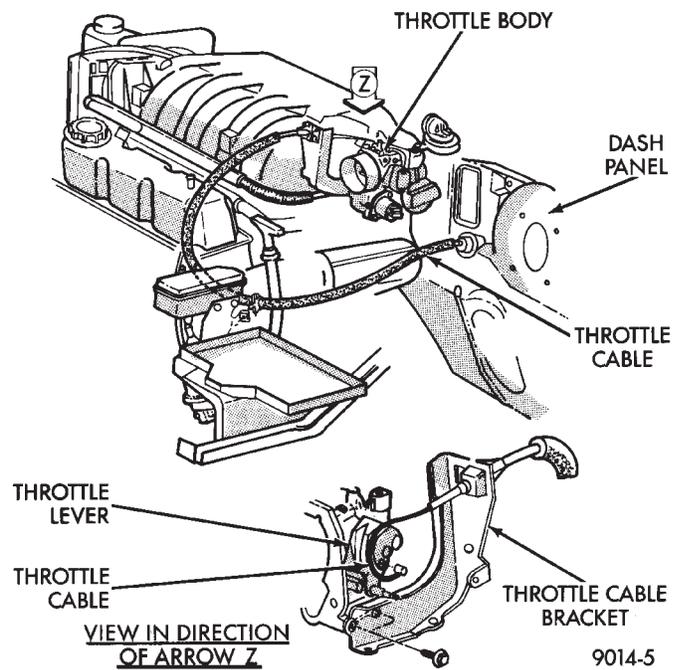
Throttle Cable Attachment to Throttle Body—Turbo III Engine
